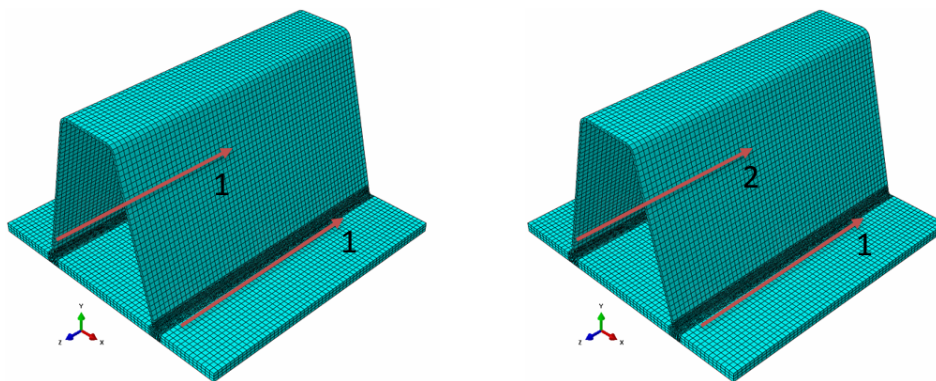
Welding direction of parallel and sequential welding
